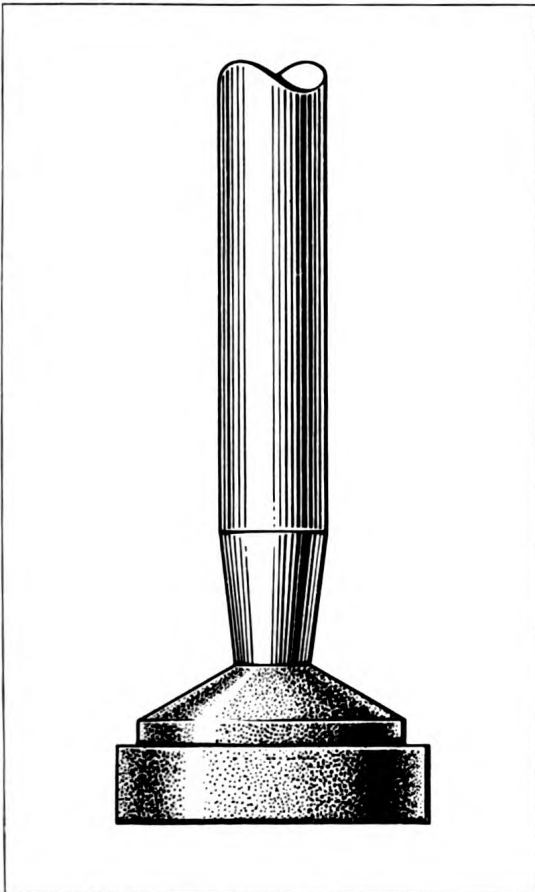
Full-face width of wheel should be reduced to avoid excessive side pressure during grinding.
